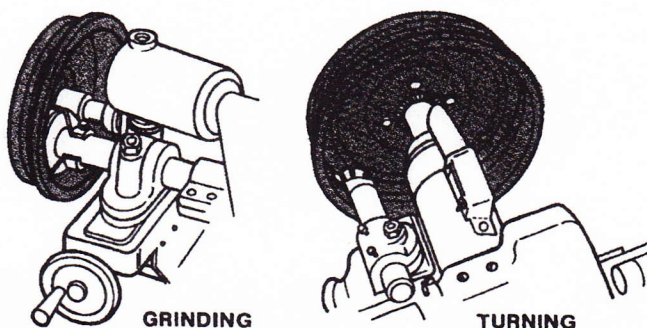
Brake drums can be remachined by grinding or turning on a brake lathe.
